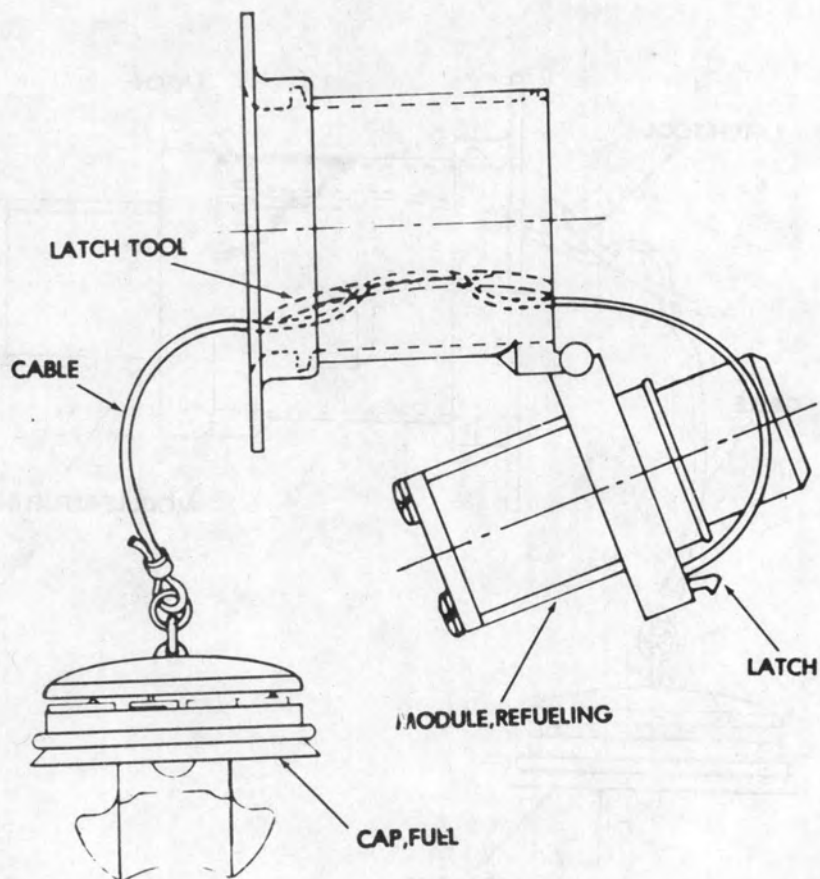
Receiver and Cap Assembly (View in open position)
